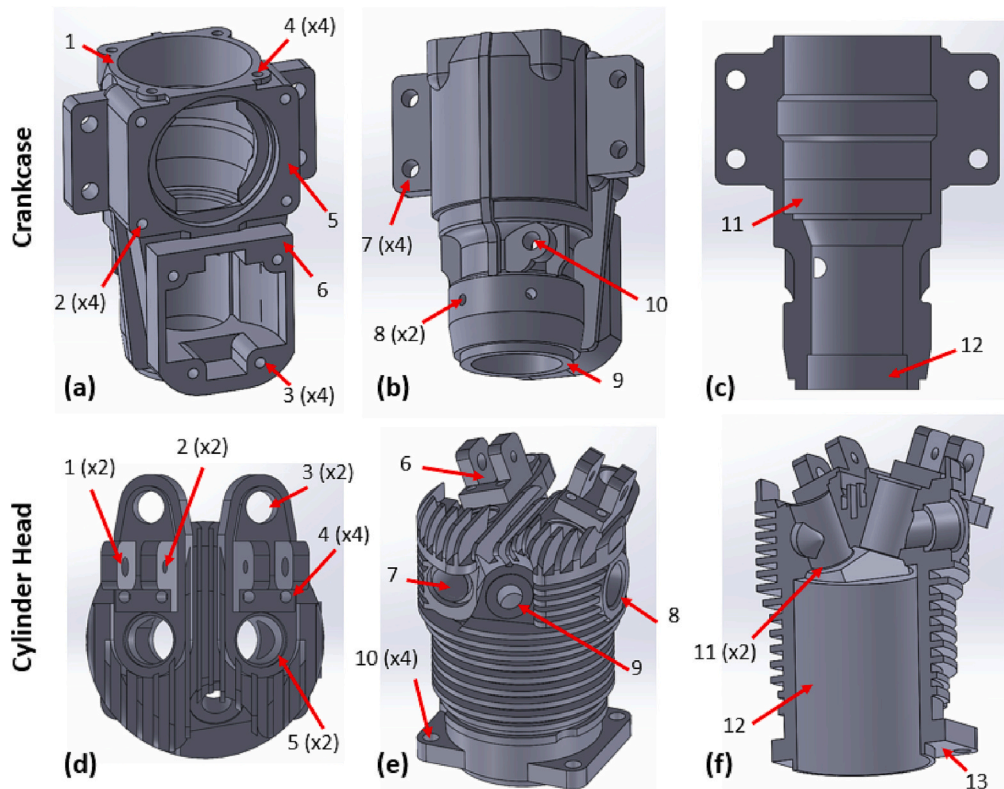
Surface and feature identification for post-machining on the crankcase's top and back gasket faces and threaded holes (a), that back threaded holes and flange through holes (b), and the internal bearing surfaces (cut view in c), and the cylinder head's external surface features (d and e), and internal features (cut view in f).
